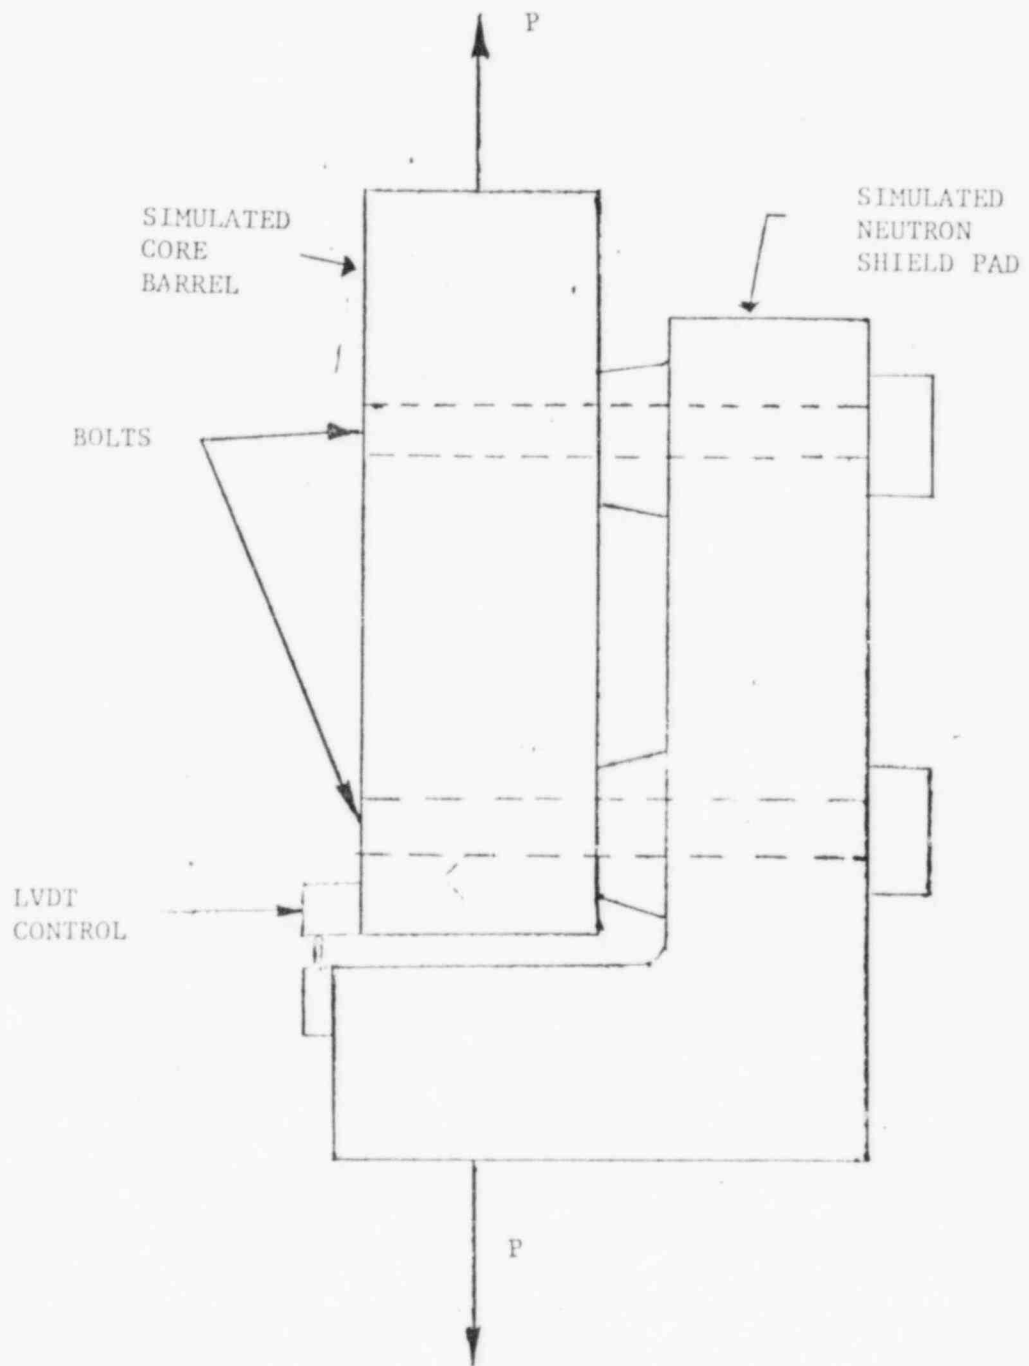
NEUTRON SHIELD BOLT ASSEMBLY SIDE VIEW
